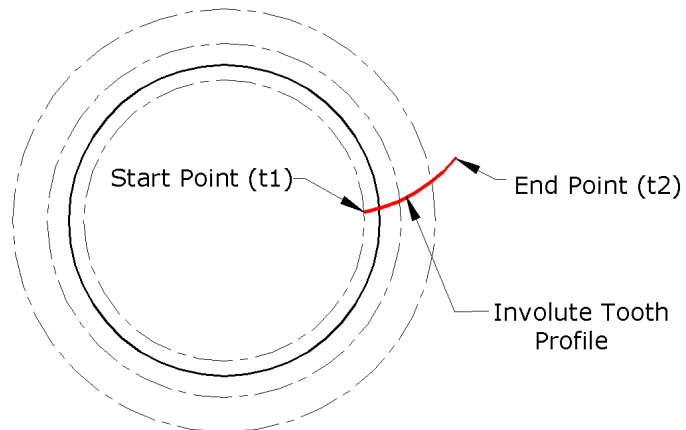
Involute Tooth Profile of a Spur Gear.
